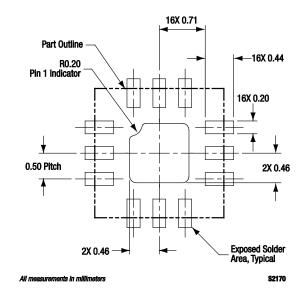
SKY13395-397LF PCB Layout Footprint (Top View)
